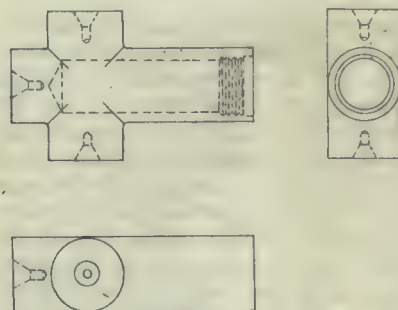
CENTERED TEE WHICH IS TO BE MACHINED.
